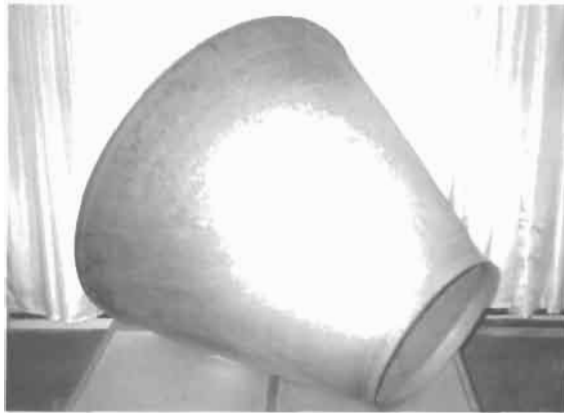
A carbon-carbon conical shell. Courtesy of CRISM.
